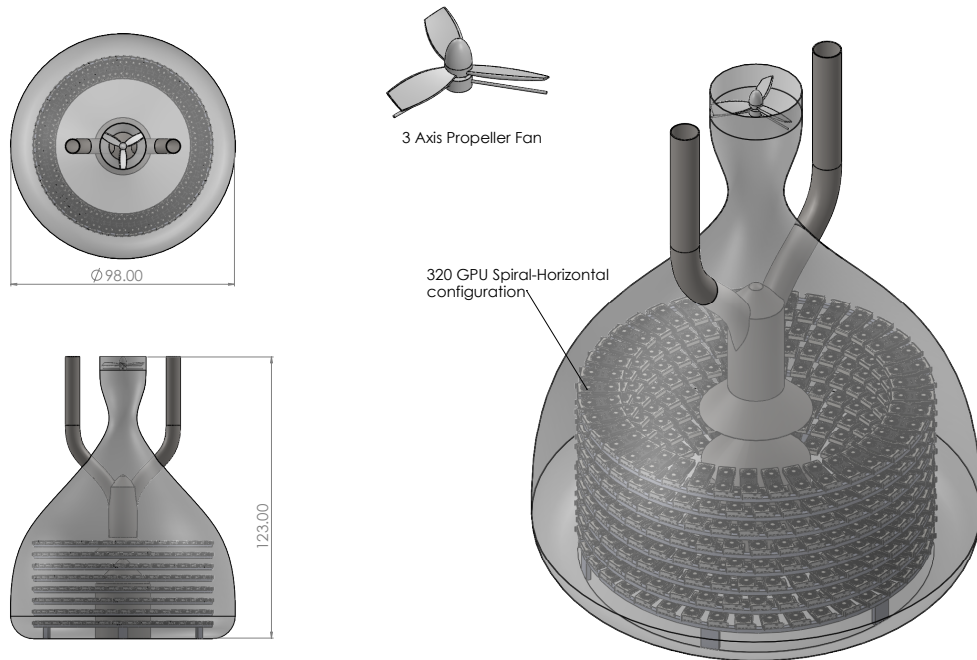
CAD model of the modified design of the Vortex Vacuum Chamber
